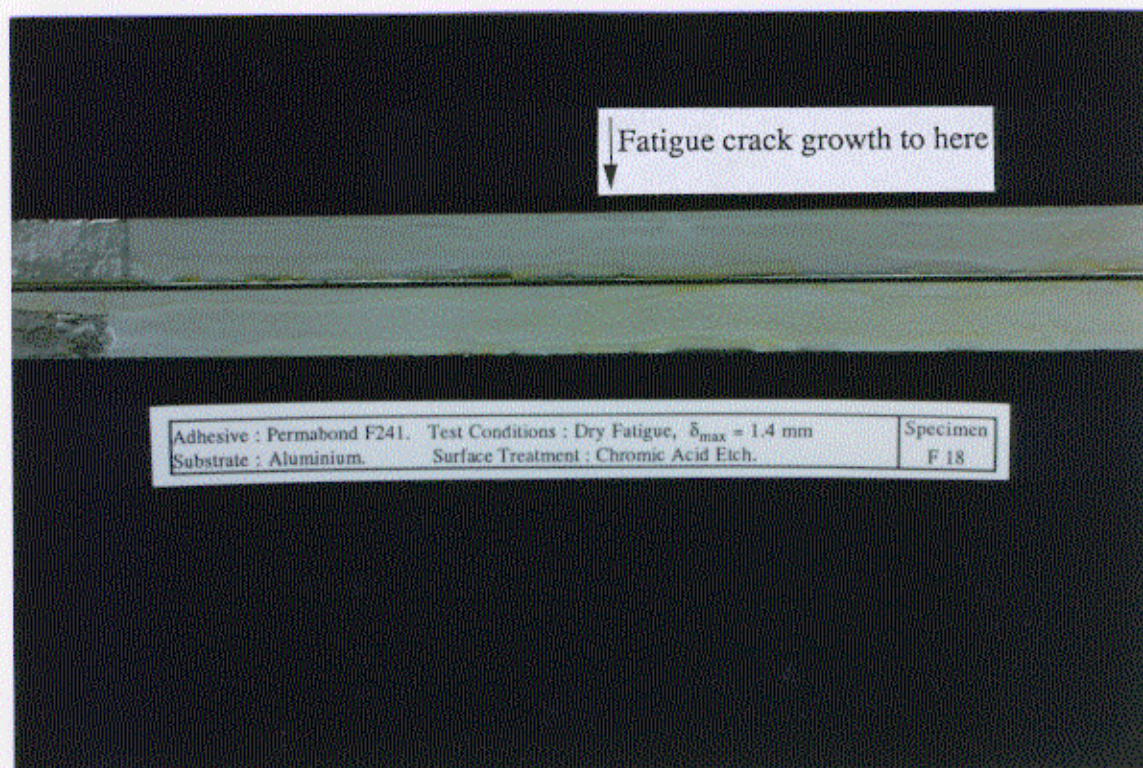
Fracture surface of chromic-acid etched aluminium specimen bonded with 'F241', tested 'dry' showing cohesive-in-adhesive failure.
